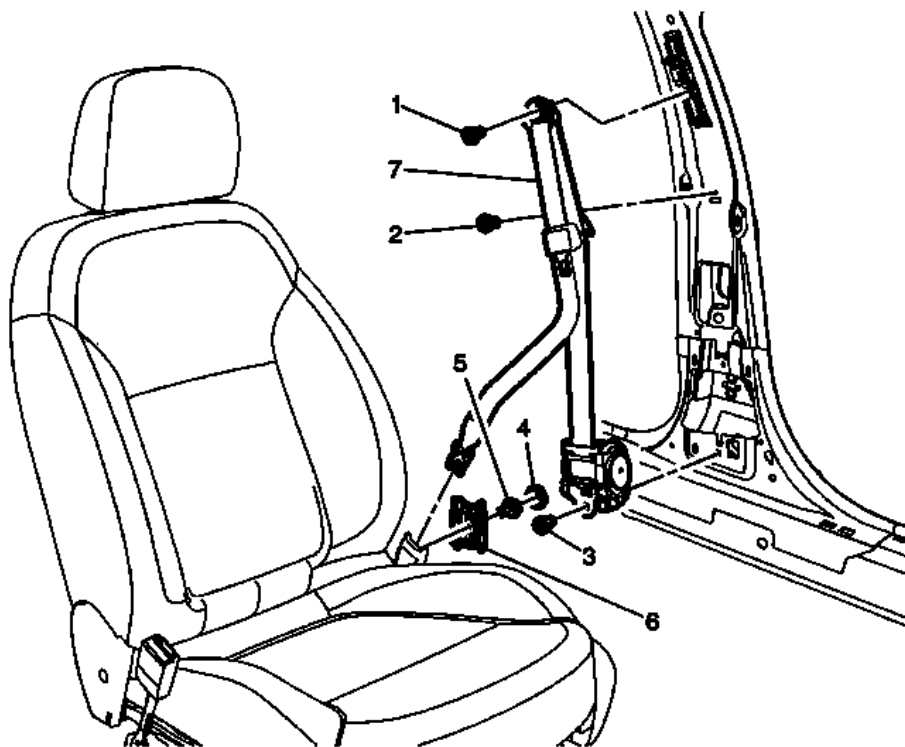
Driver or Passenger Seat Retractor Side Belt
